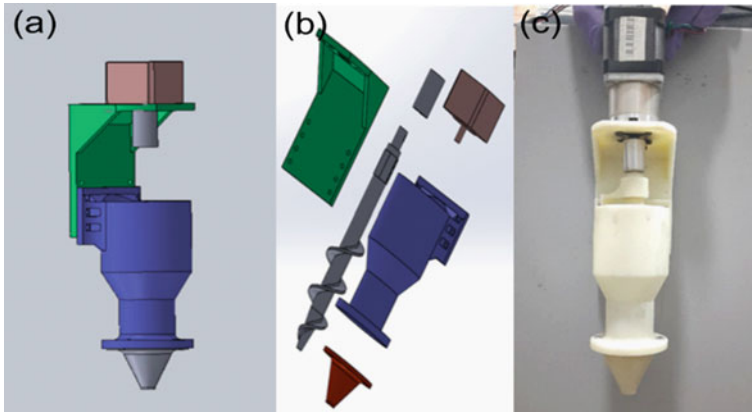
CAD model and physical model of augur screw-based extrusion system; a CAD assembly, b exploded view of assembly, c physical model assembly
